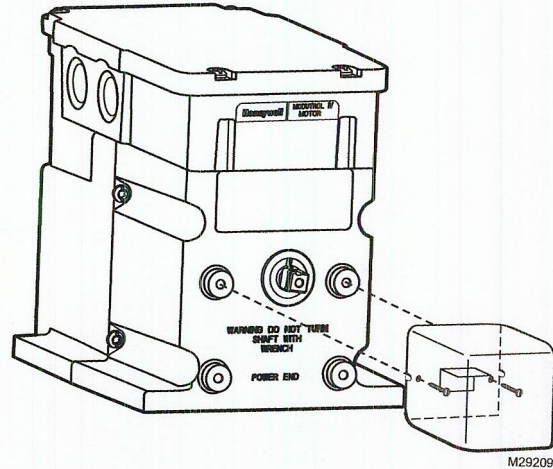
Mounting the Q181 on M9184 style modutrol motor, or any motor with bosses.
